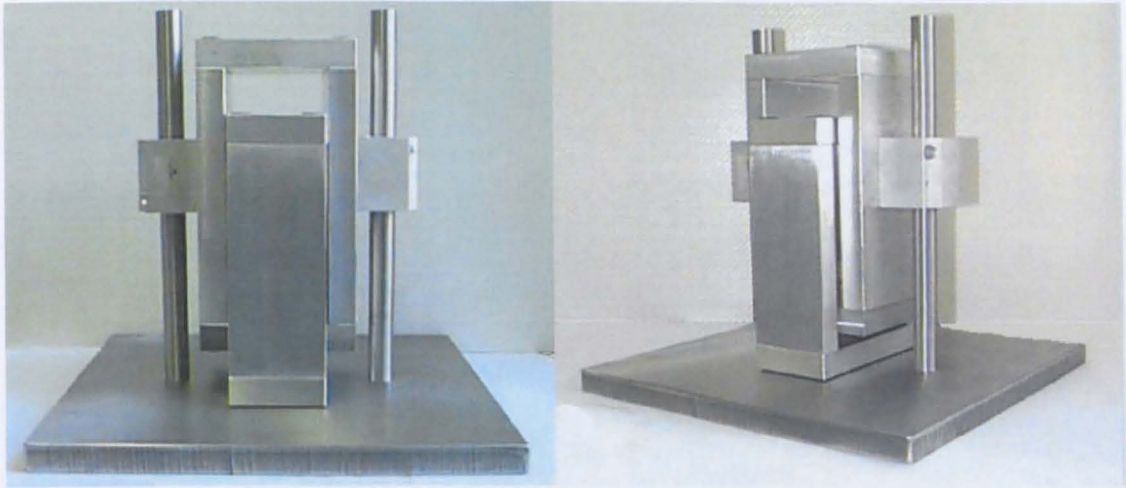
Original impact tensile test fixture designed by Fernie [6]
